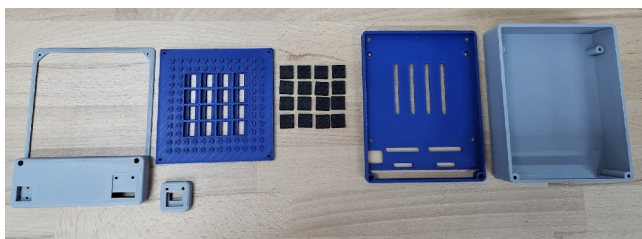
The parts necessary to construct the base made using 3D printing technology.
